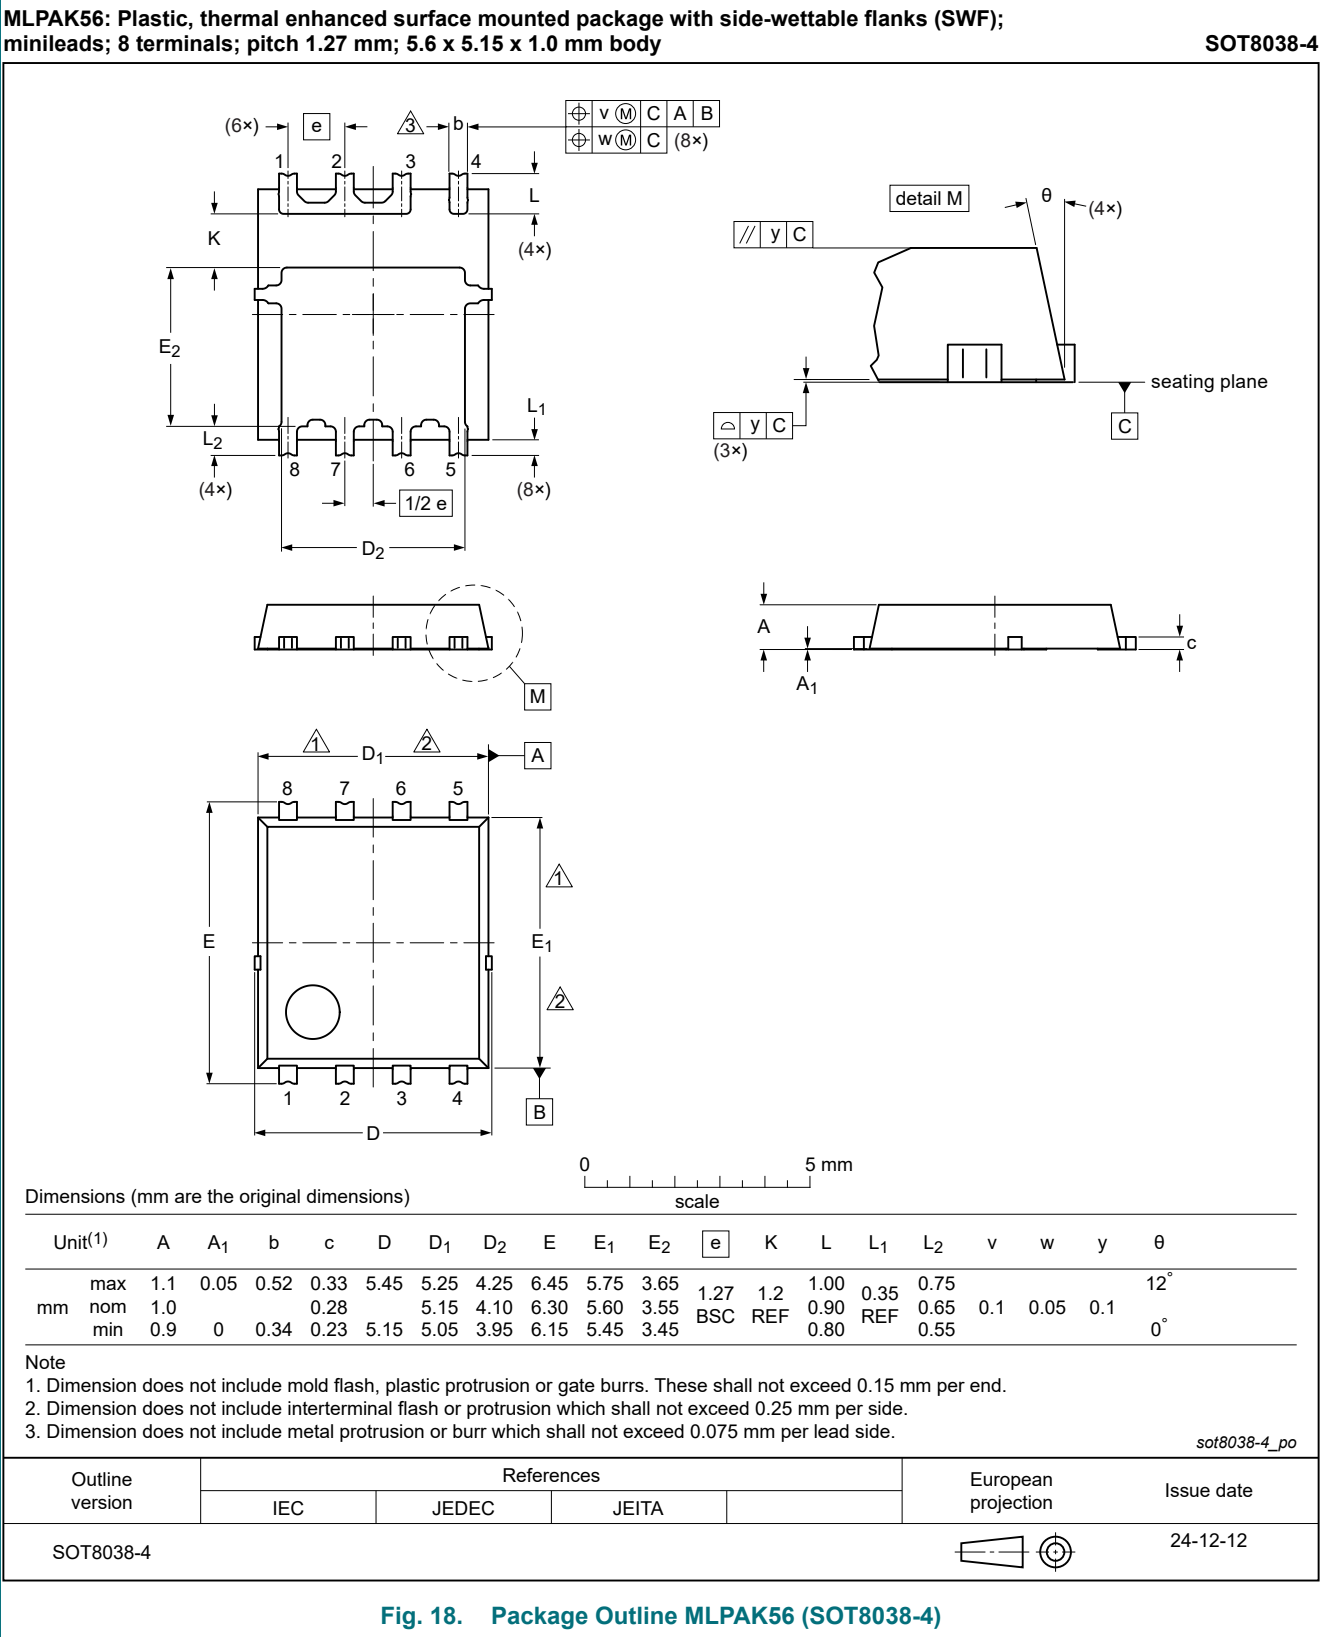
Package Outline MLPAK56 (SOT8038-4)
